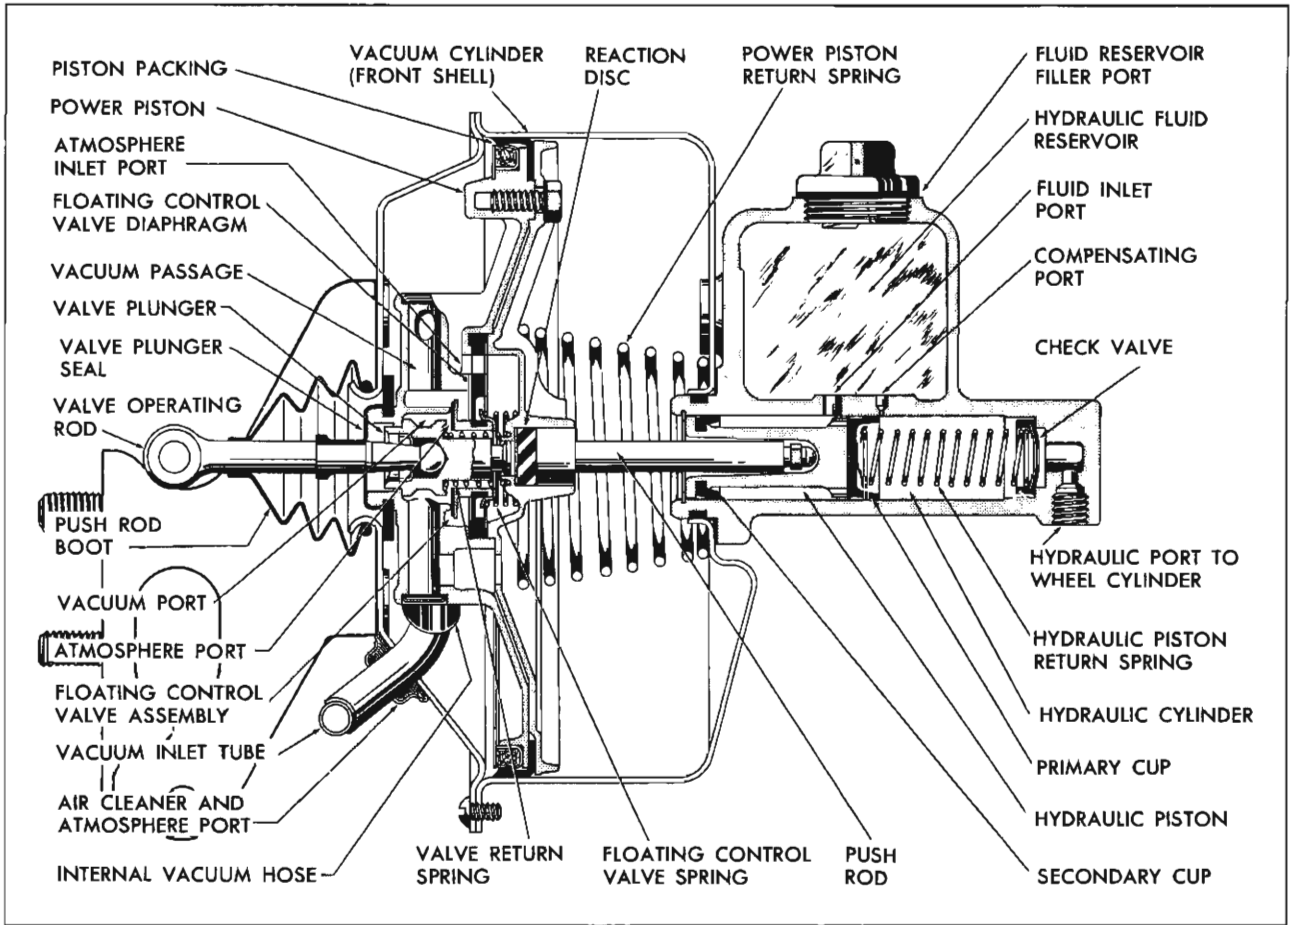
Cutaway View of Bendix "Master-Vac" Power Brake
